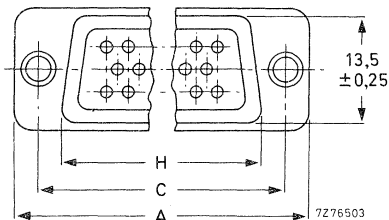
Terminal side of pin (or socket) connector; see also Table 2.
